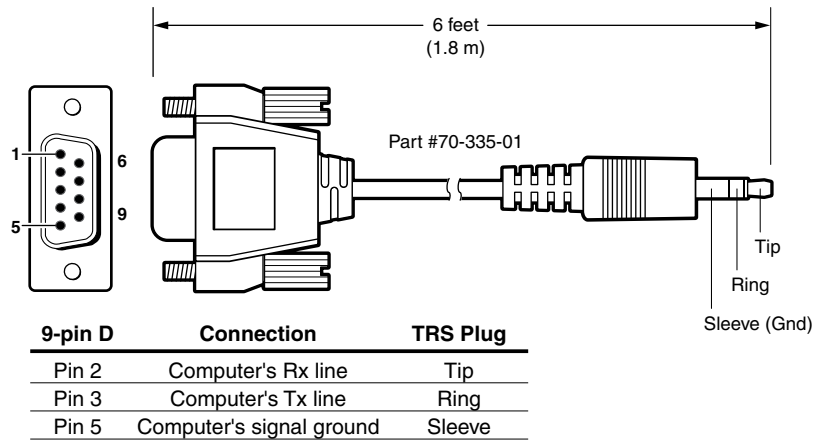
Optional 9-pin TRS RS-232 cable
